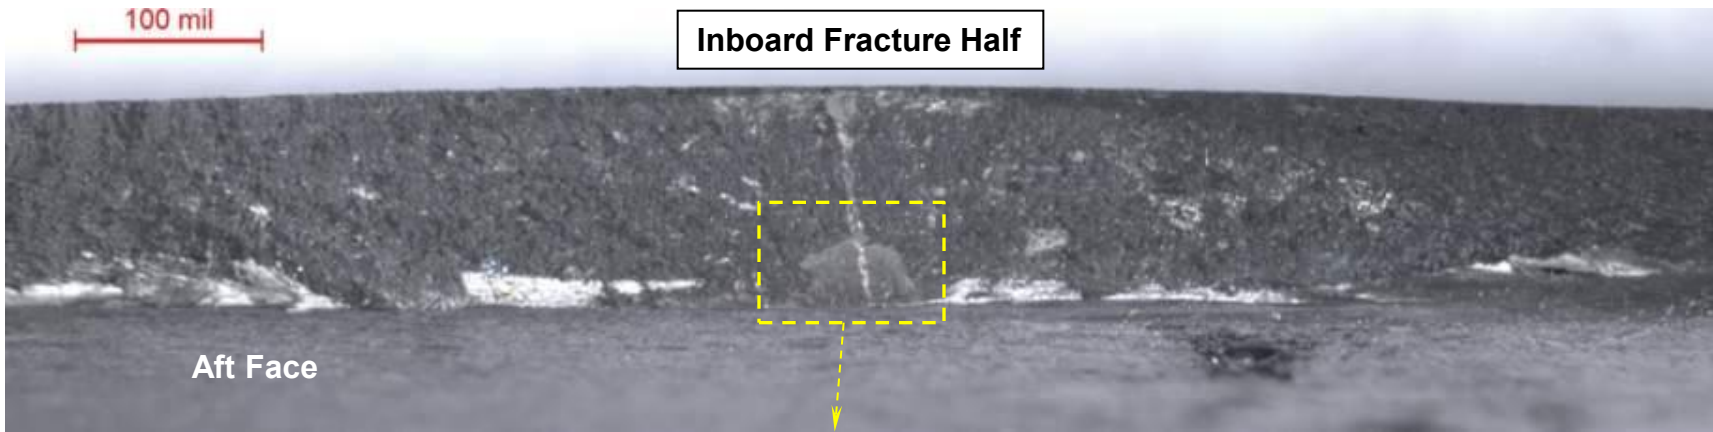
Optical view of the forward side of the web mating fracture halves showing that the fracture extended in the rim to web transition region, approximately 0.15 inch inboard of the machining mismatch.
